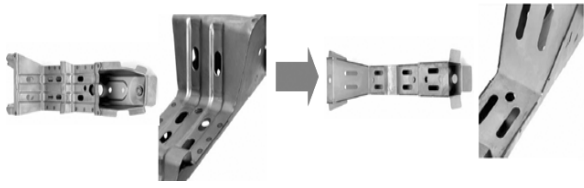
The production of lightweight auto- motive parts through laser welding
